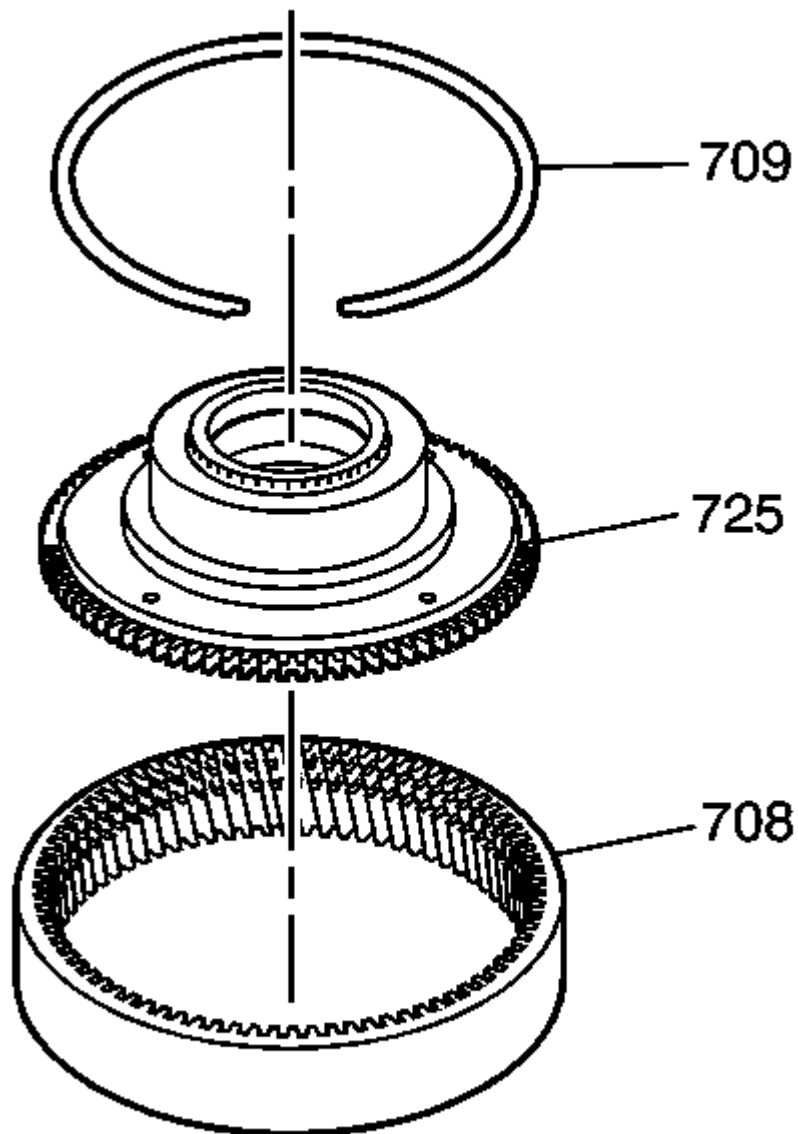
Locating Input Internal Gear, Snap Ring And Input Internal Gear Flange
